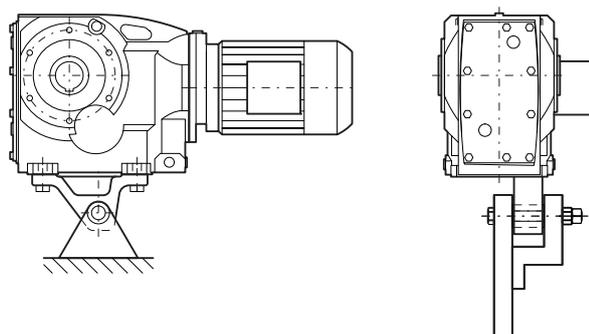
Mounting suggestion for torque arms on bevel gearbox K
